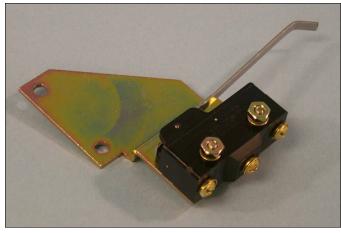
Microswitch Installed on the Auxiliary Switch Mounting Bracket.
